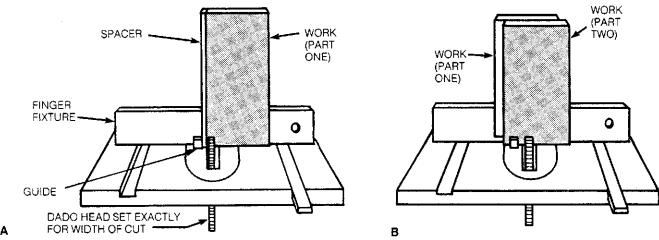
(A) Make the first cut with guide strip between the work and the guide block. (B) Make the next cut as shown.
